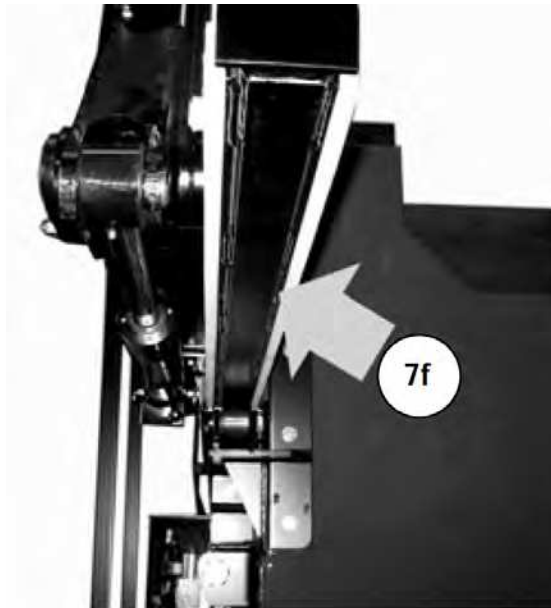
Mechanical on Curotto-Can Assemblies Weekly Check Slide Assembly Steel Wear Strip
